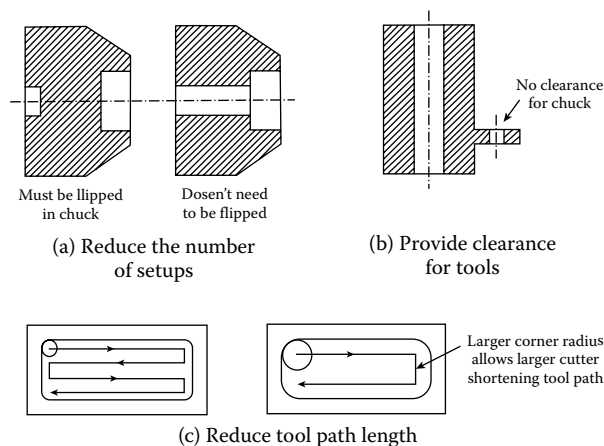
Approaches for simplifying the machining of a casting^[7]
